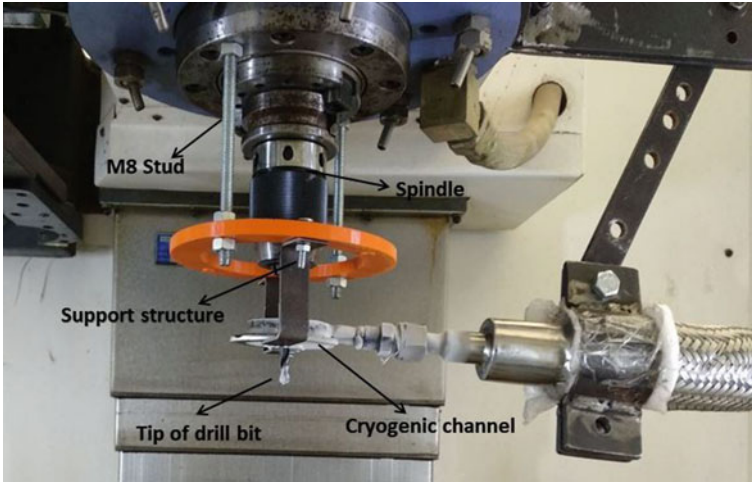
Tip of drill bit getting cooled just after initiating LN₂ flow
